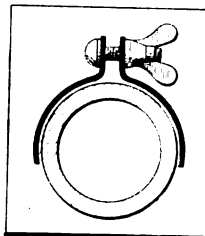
Showing the winged nut on a clamp joint. This is a handy means of connecting the radiator and tubing.
